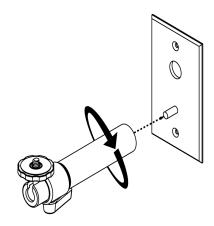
Attach to the Threaded Stud on the Mounting Plate
